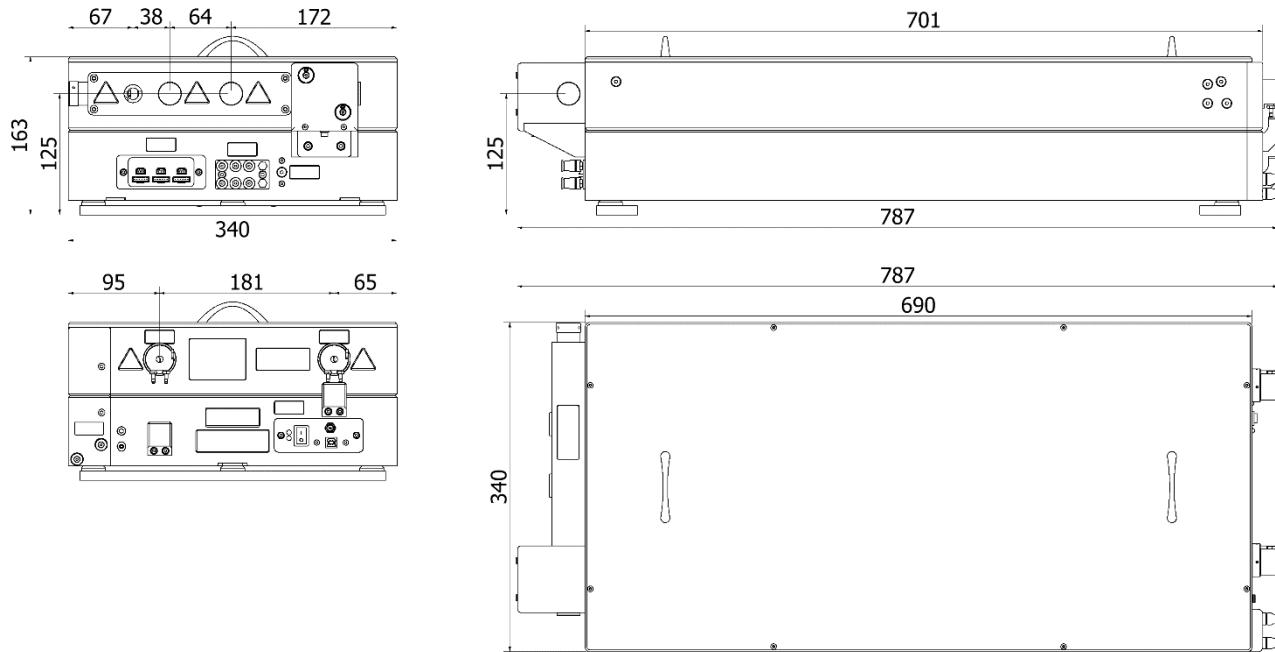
Physical dimensions (mm) of ORPHEUS-HP housing
